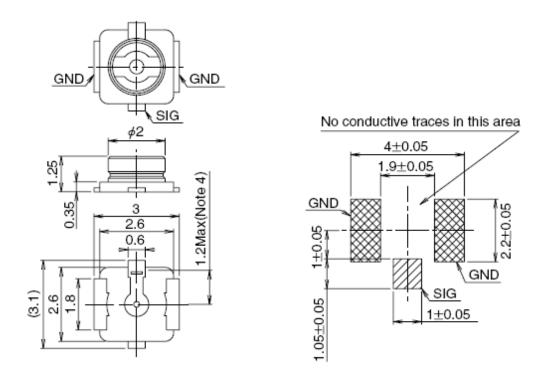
Dimensions of the U.FL-R-SMT Connector (Unit: mm)
